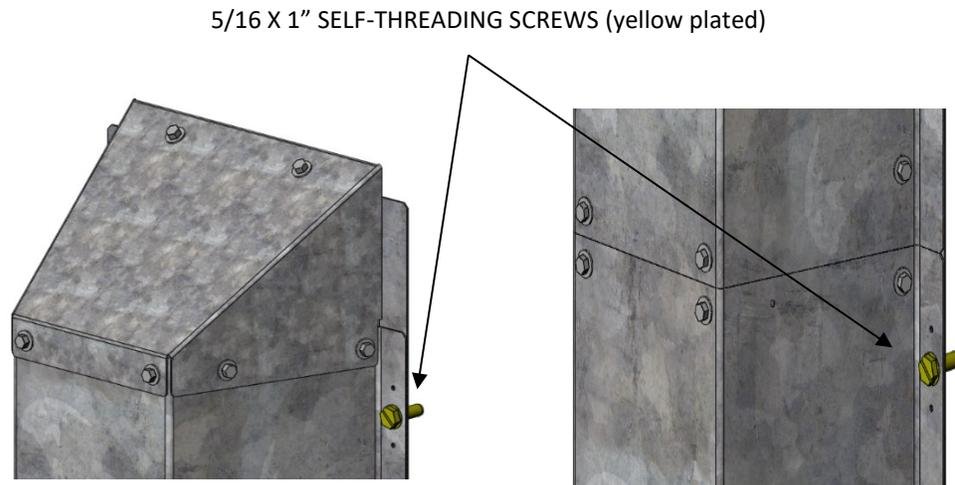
Top of Column Assembly & Mid-joint of Column Assembly
